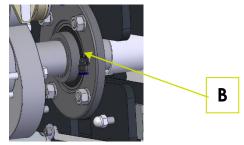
Mounting the drive train Lubrication lines on the right side
